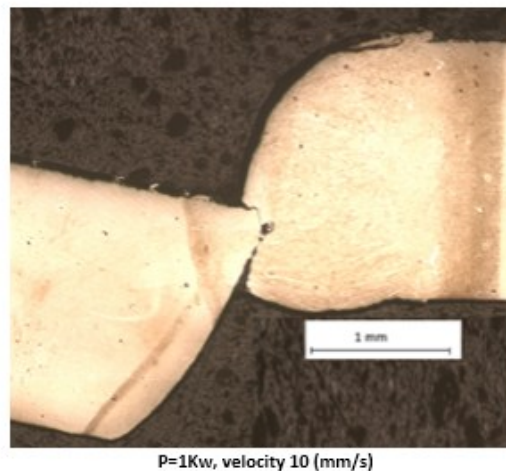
Proximity laser welding, spot dimension=0.1 mm
